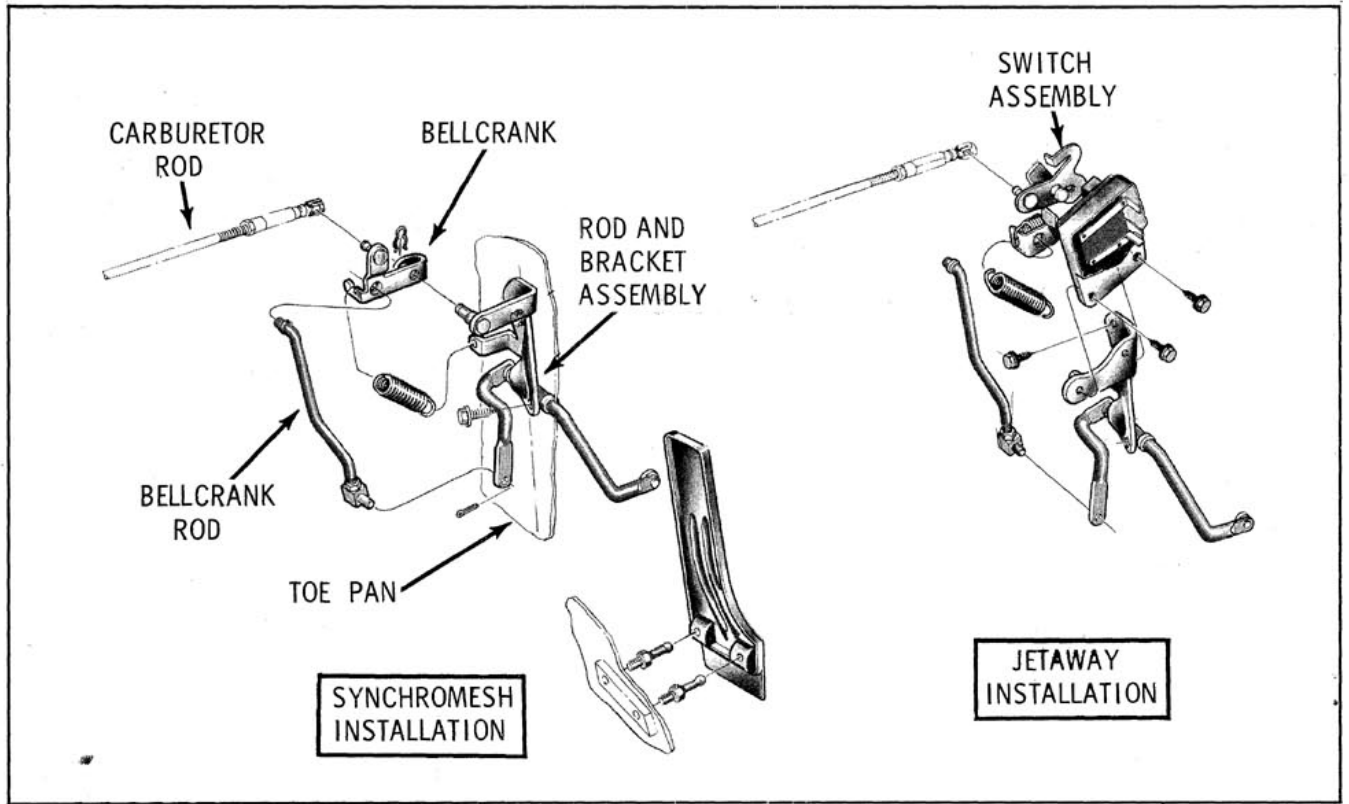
34-36-38 and 52 Series Throttle Linkage
